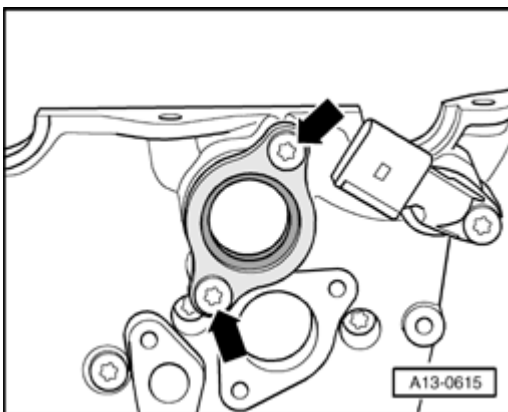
Removing/Installing Sealing Flanges For Camshaft Adjuster On Left/Right Covers For Timing Chain
